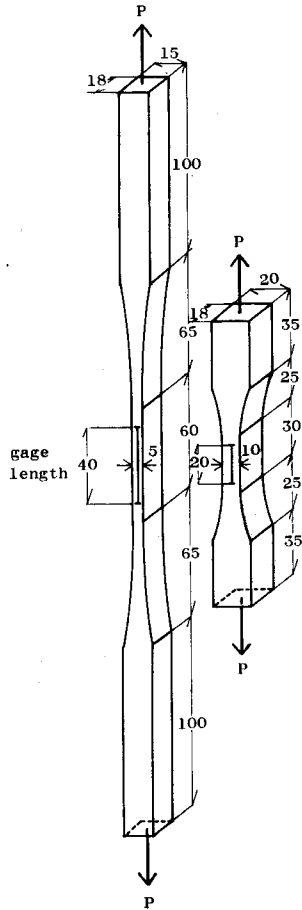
Tension test specimen of veneer laminated wood. (unit: mm)
